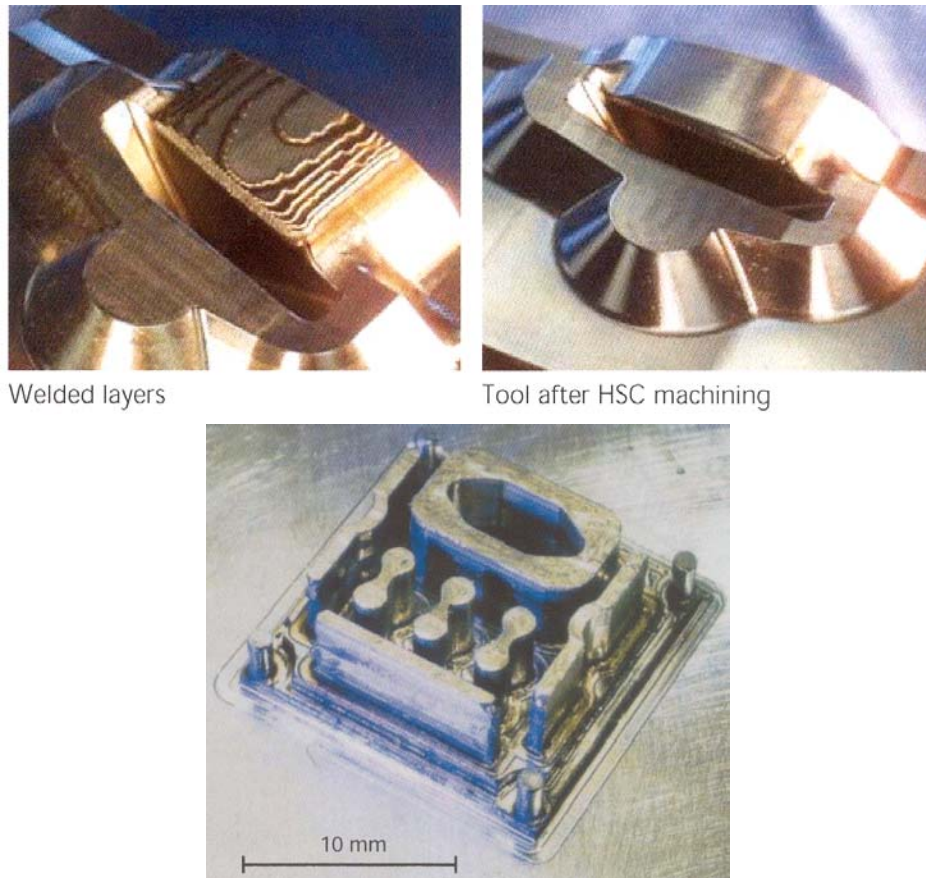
Representative parts produced using Controlled Metal Build-Up. Shown are part generation and repair after welding and machining. (Fraunhofer IPT, Aachen)
